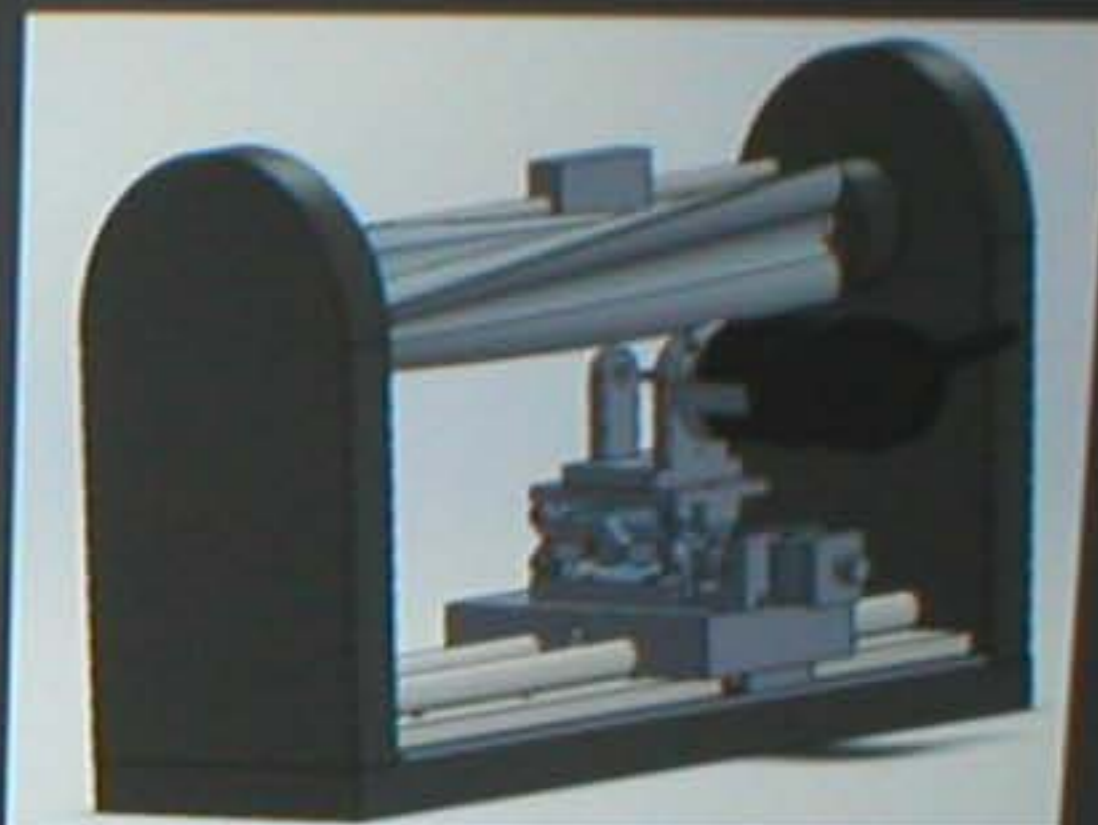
Integrated final design with ability to measure & cut OD & ID
